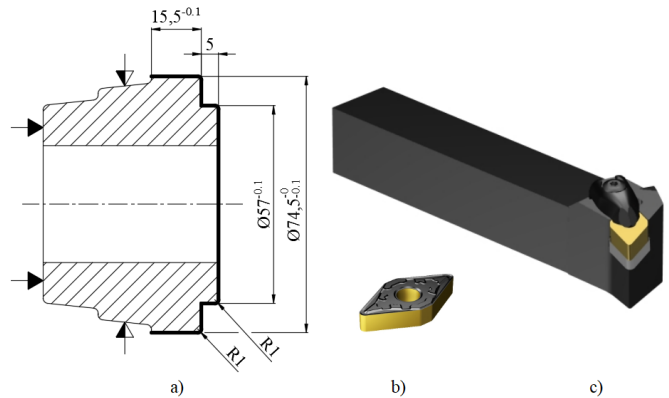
(a) Third pass, (b) Indexable insert, and (c) Shank tool
